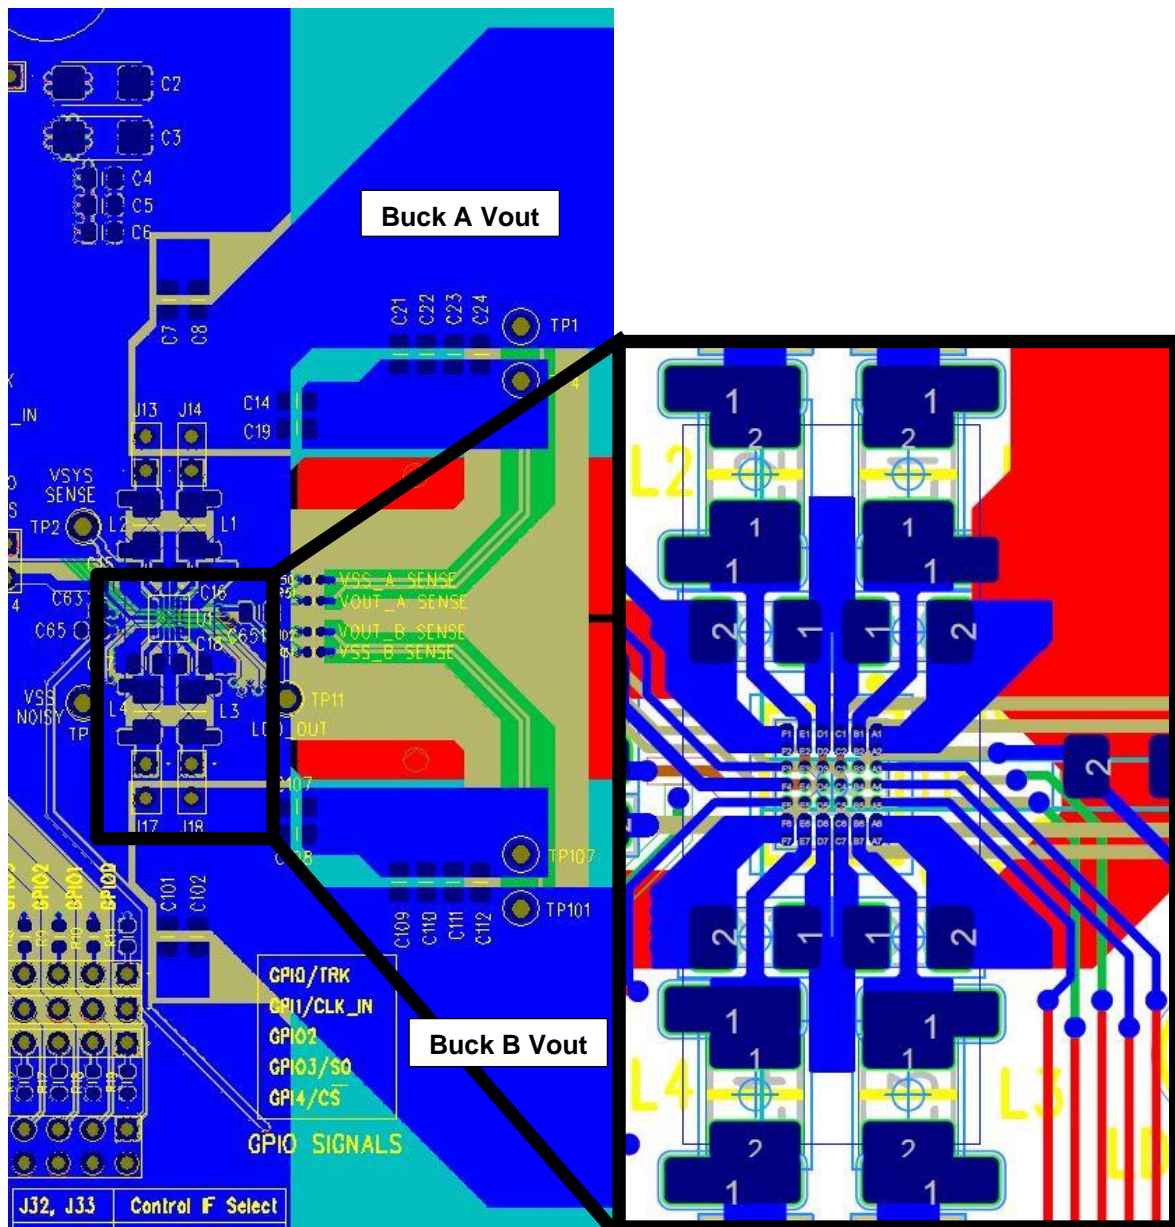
Example of components placement on 6-Layer PCB using μ Vias technics
